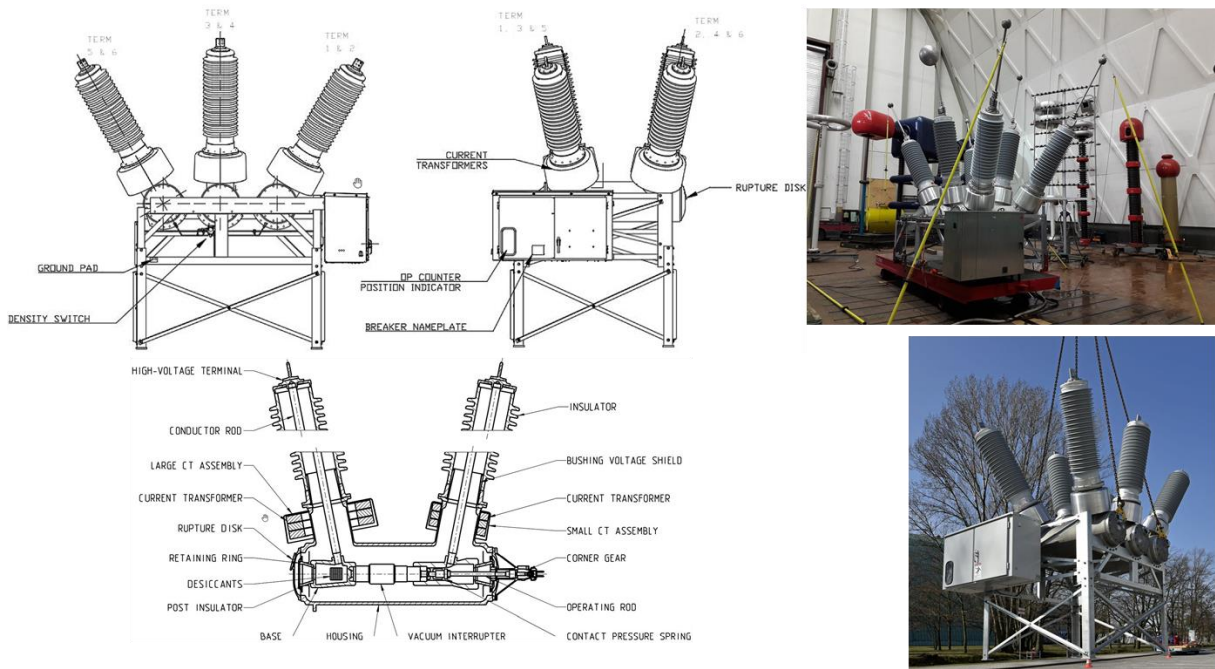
First order outline, 123 kV, 40 kA Dead Tank Circuit Breaker with Vacuum Interrupting and Clean Air insulation technology, HV-type testing, and type-tested product
